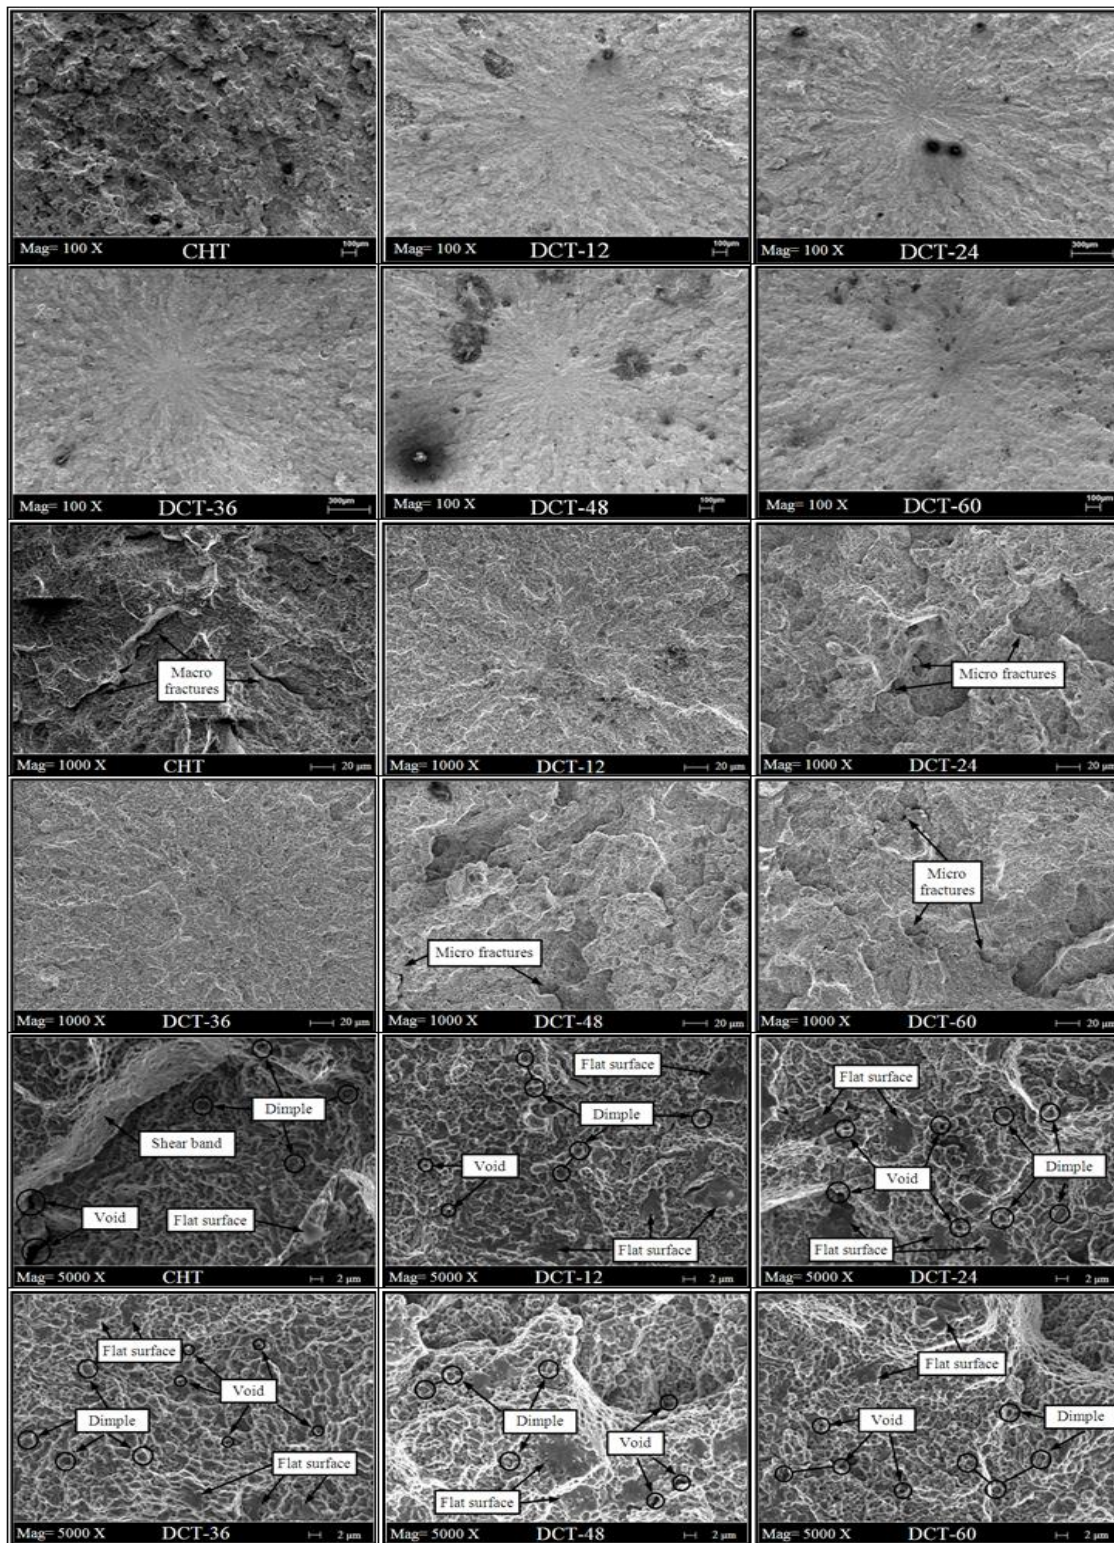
Fracture surfaces of tensile specimens.
